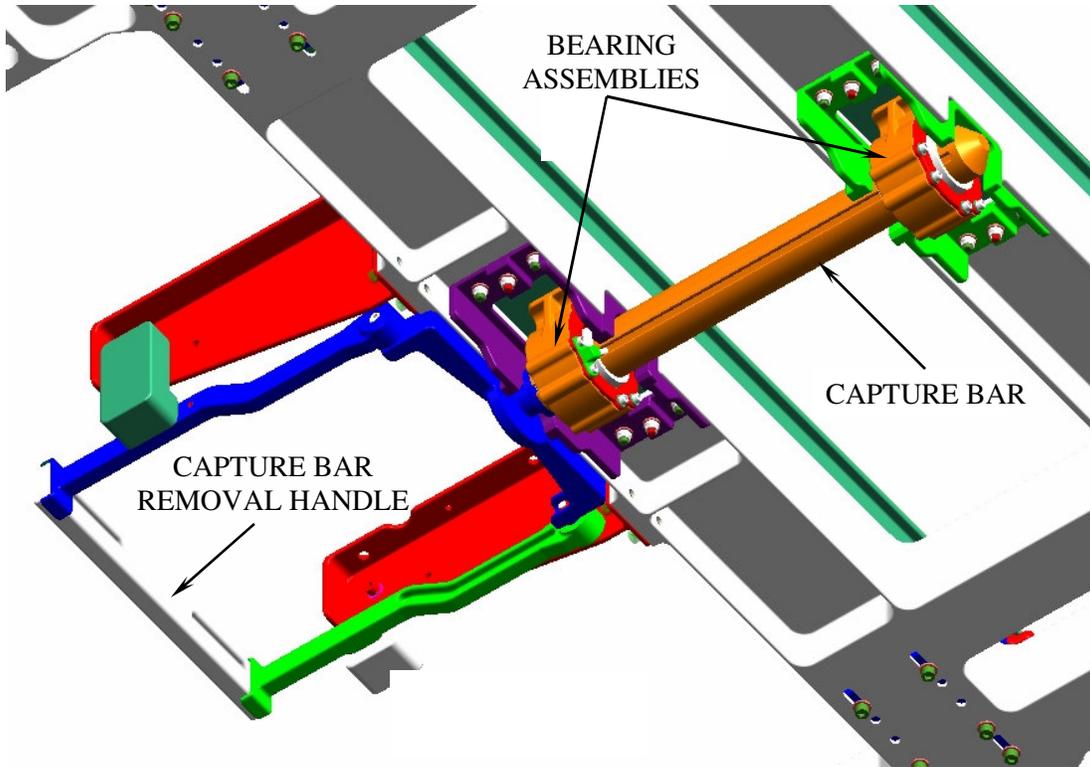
EVA Removable Capture Bar Assembly (1 of 2)
